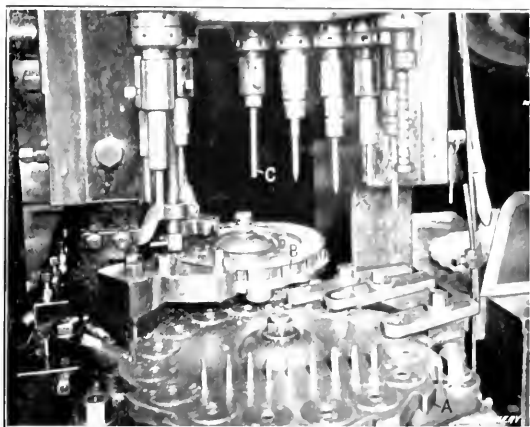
Machine used for forming the Nickel Cases of Spitzer Bullets and assembling the Lead Fillings in them
